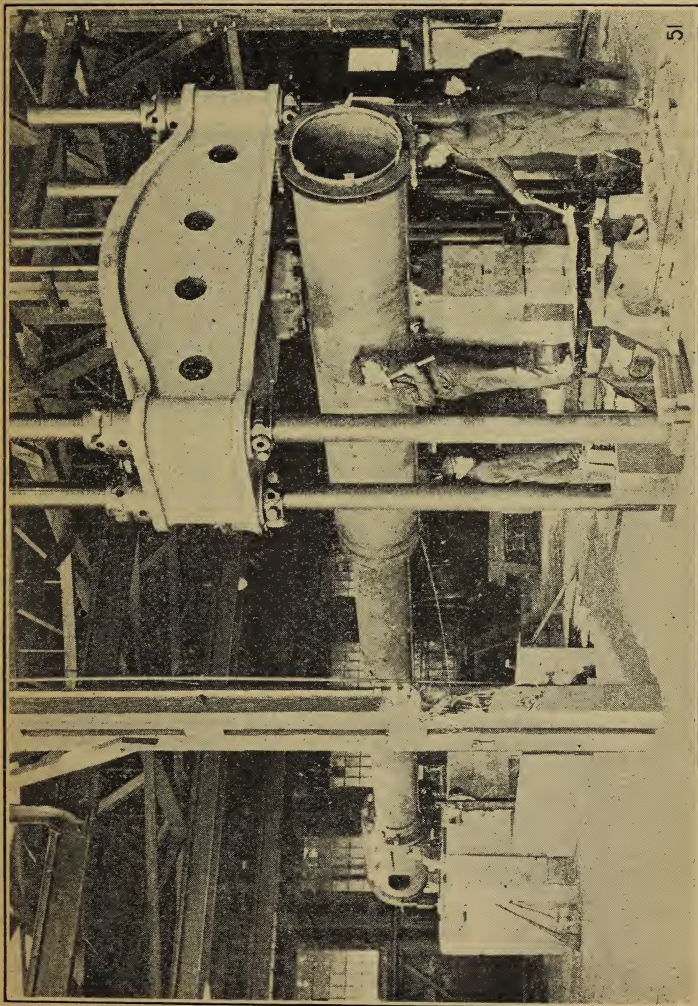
PRESSING THE LONGITUDINAL LOCK-BAR JOINT
